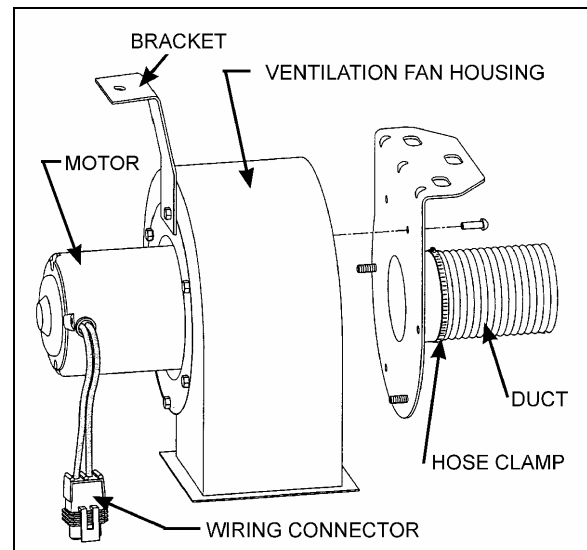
VENTILATION FAN INSTALLATION 23222
